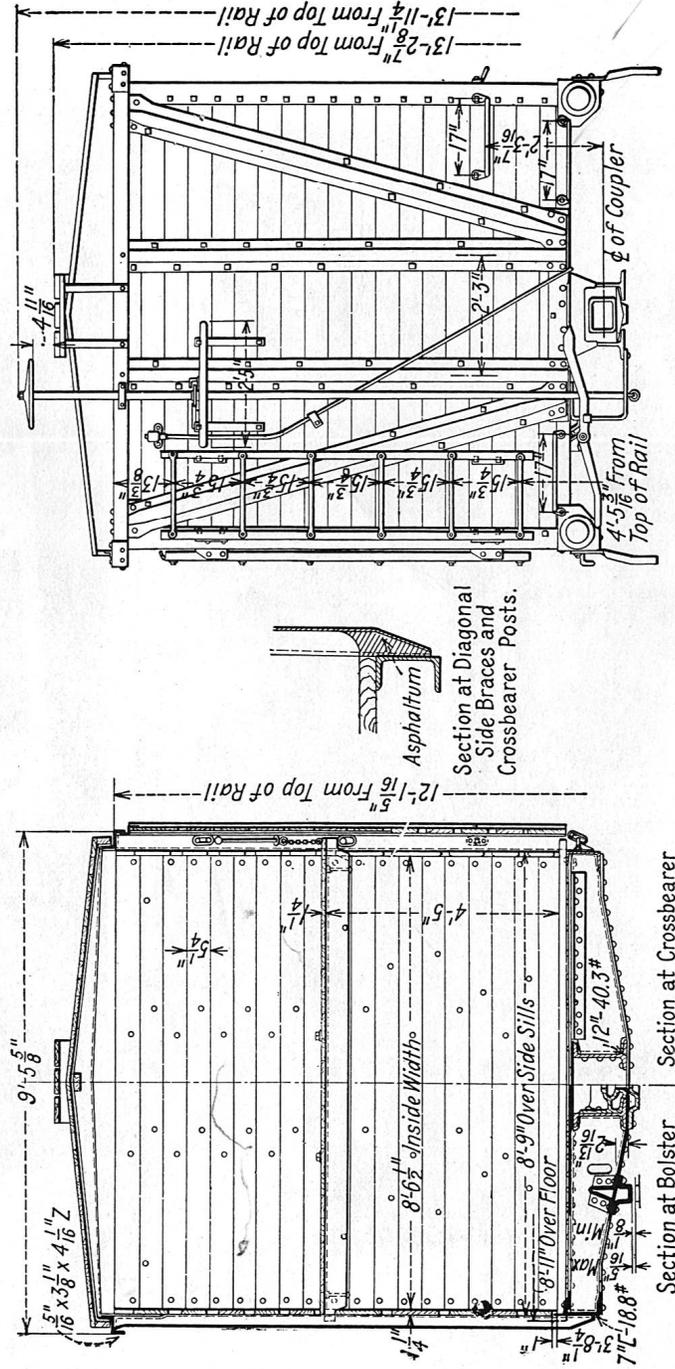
Cross sections and end elevation of The Pennsylvania Railroad convertible single- or double-deck stock car shown in Figs. 2.211 and 2.212.
